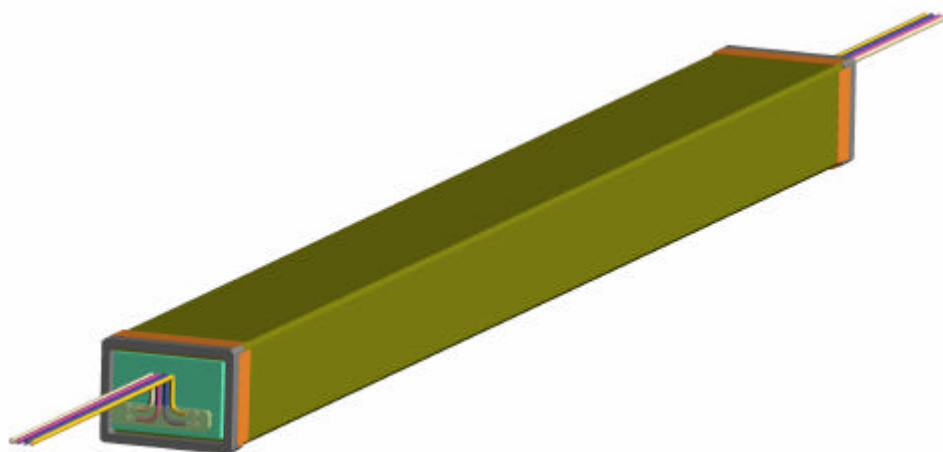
Crystal Detector Element assembly. Note that the CDE is depicted with its “top” surface – with the seam-sealing tape – down. The seal tape is therefore not shown. The CDE Assembly Drawing is LAT-DS-1900.
